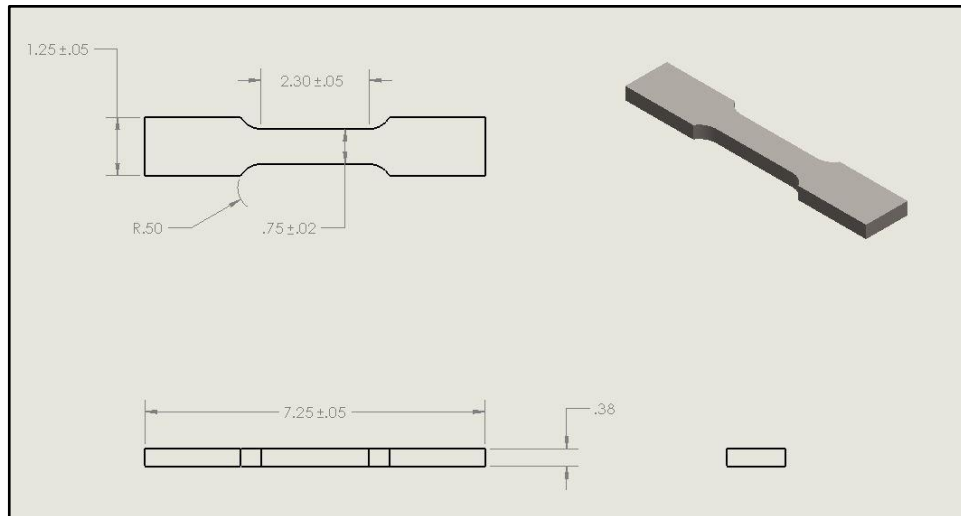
The tensile coupons were dimensioned as shown using a mill.
